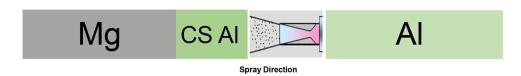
Cold Spray 6061 Al deposited on the edge of the ZE41A Mg, 'Buttering the Edge'.
